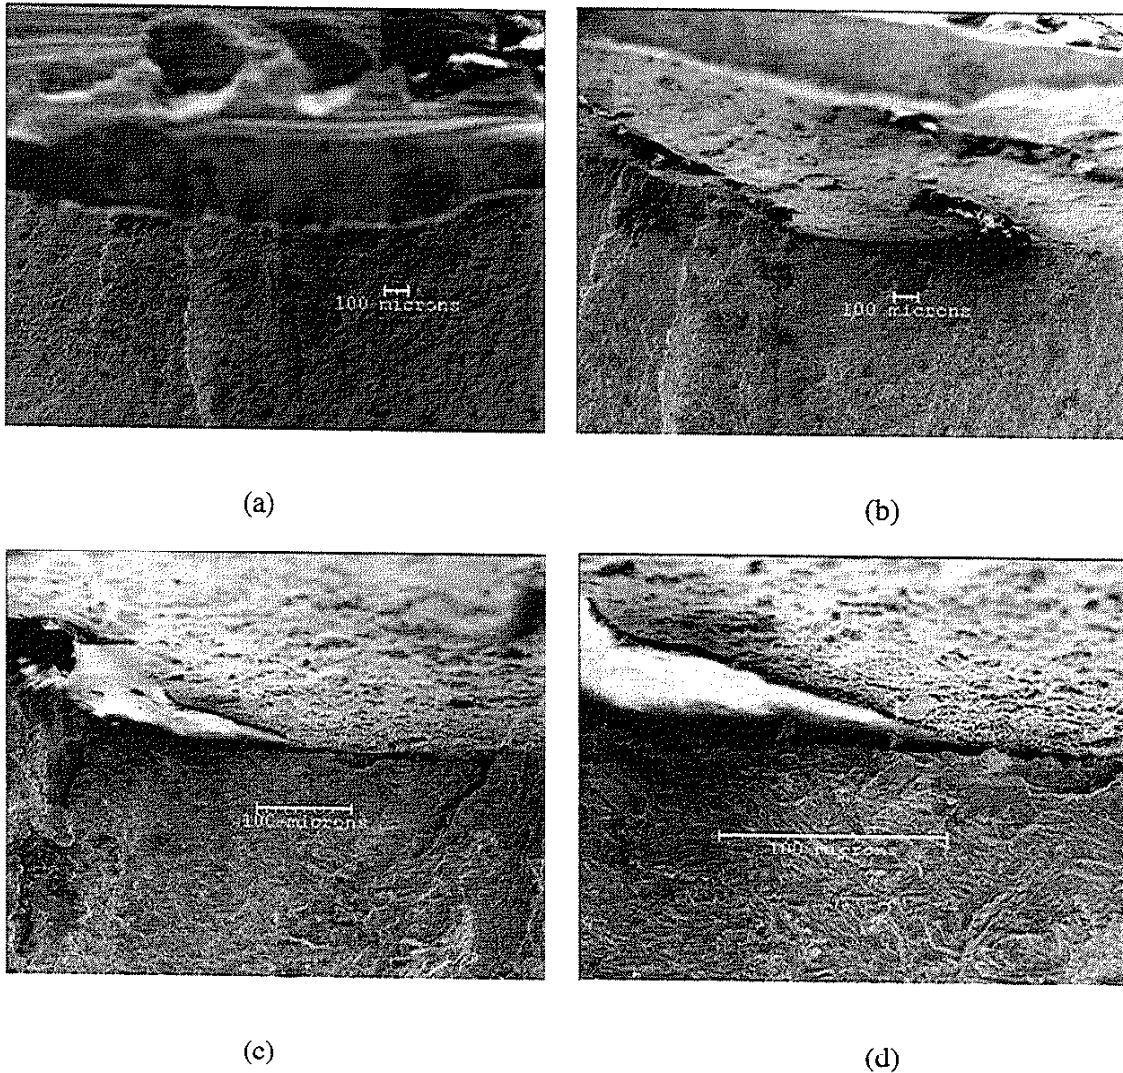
Scanning electron microscope images of the fracture surface showing a cold-lap defect: (a) looking straight down (0°) on the cold-lap defect (30X), (b) specimen tilted 28° to show the depth of the cold-lap defect (30X), (c) specimen tilted 28° at a magnification of 130X, (d) specimen tilted 28° at a magnification of 300X. An impurity from the weld process (probably slag) appears at higher magnification in (c) and (d).
